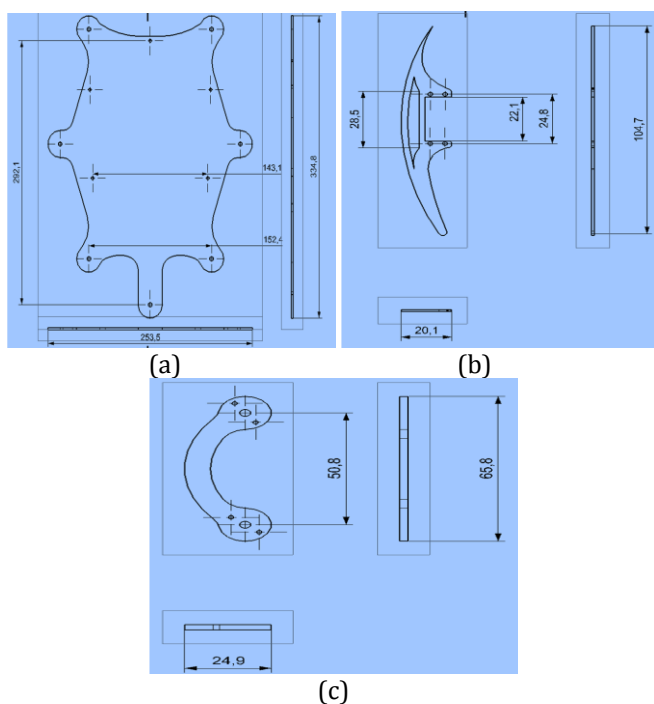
Figure shows (a) Draft design of Bottom plate; (b) Draft design of Leg; (c) Draft design of Connecting link
